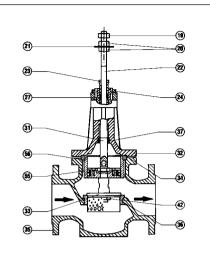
Model 7 single seated valve body direct acting, with cage seat and perforated trim
